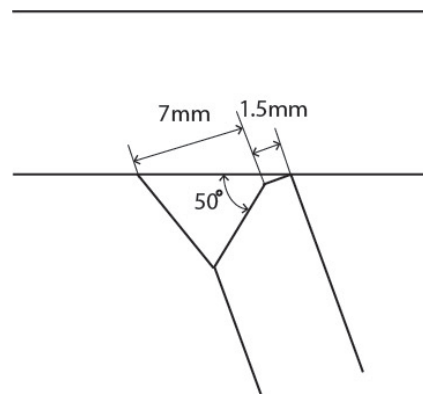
Detail A: Geometry of the weld [mm]
